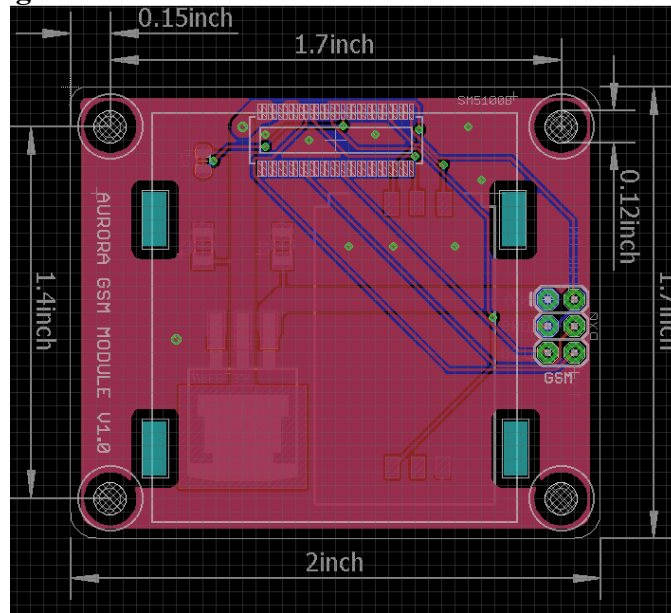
EAGLE Board View of GSM Module with PCB Dimensions
